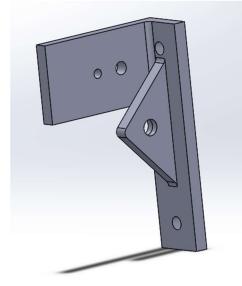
Welded Cross-Tensionsing Cable Bracket
